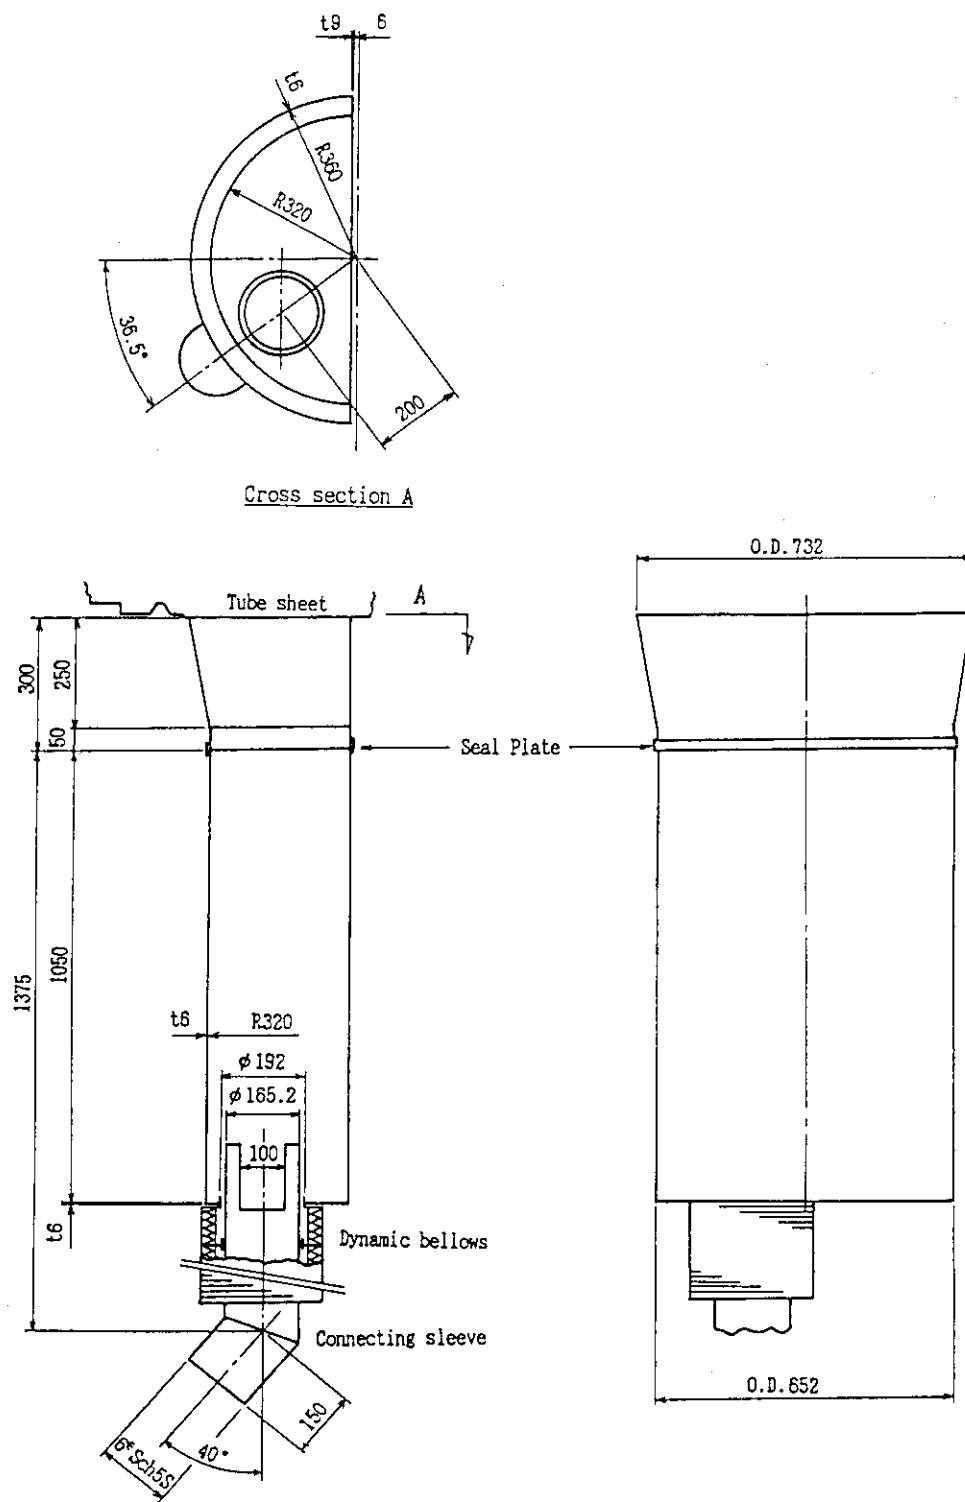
(b) Details of Outlet Plenum Compartment
